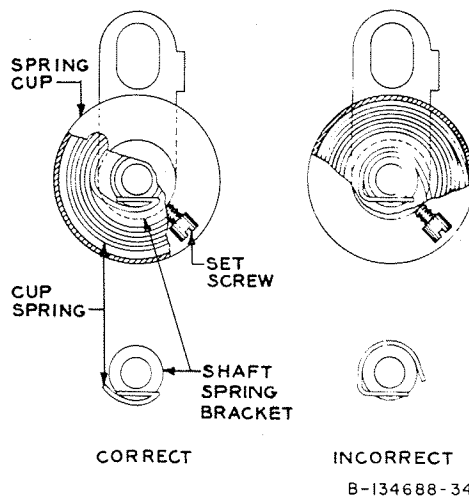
Correct and Incorrect Methods of Attaching the Spiral-Type Cup Spring to the Shaft Spring Bracket
